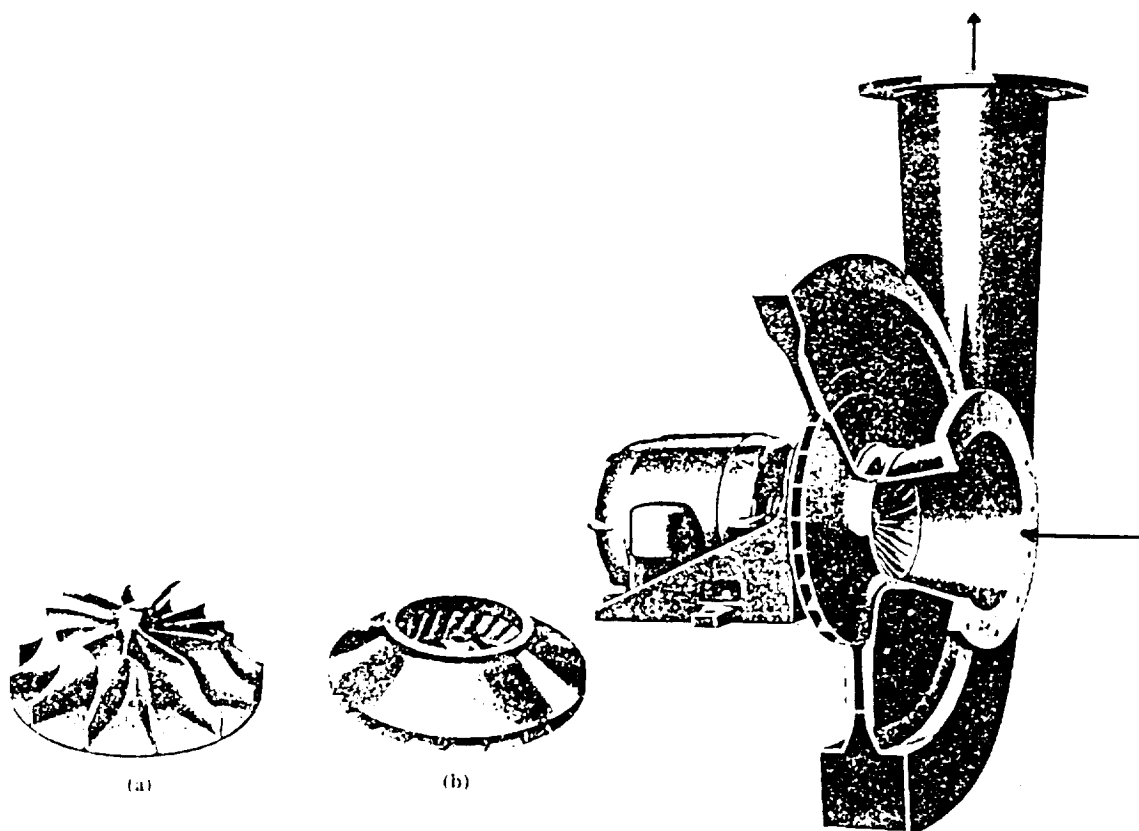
Cutaway View of a Single-Stage, Single Inlet Centrifugal Compressor with Closed-Type Impeller
